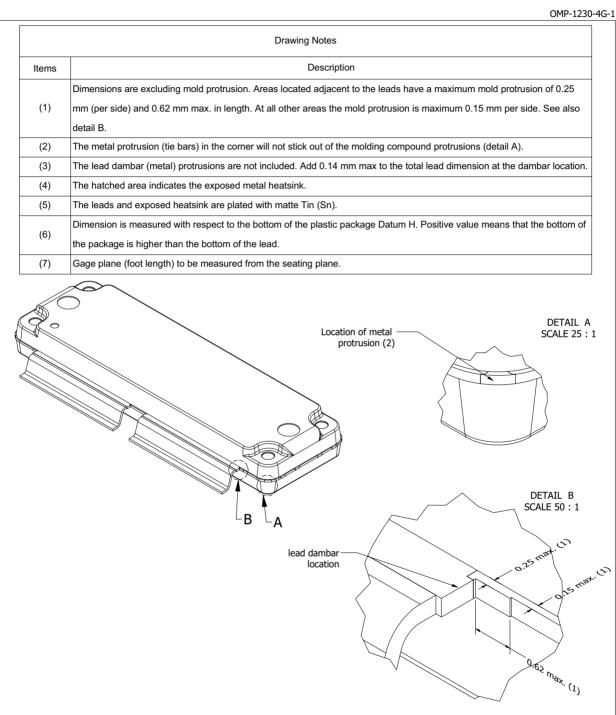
Package outline OMP-1230-4G-1 (sheet 2 of 2)
